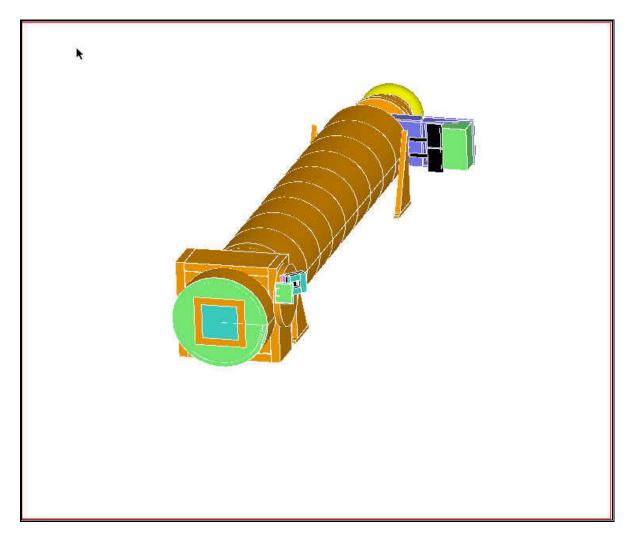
TSS Model Showing External Surfaces for AHEAD Stowed Boom
